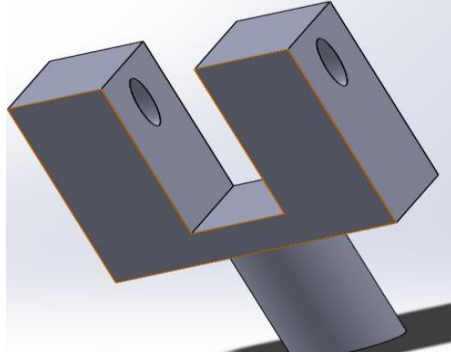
Part (a) with a Point Attachment to the Compression Machine
